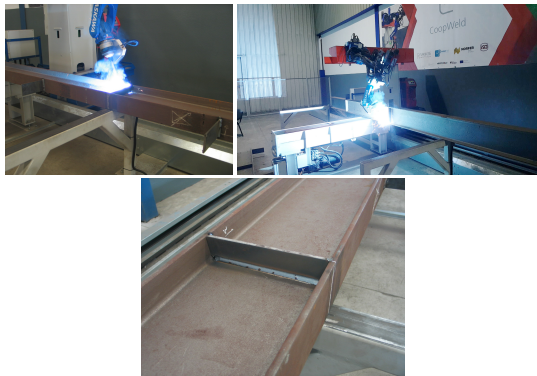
Seam weld of a beam attachment performed by the CoopWeld work cell
